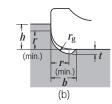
2 Chamfer Dimensions, Fillet Radius, and Shoulder Height
